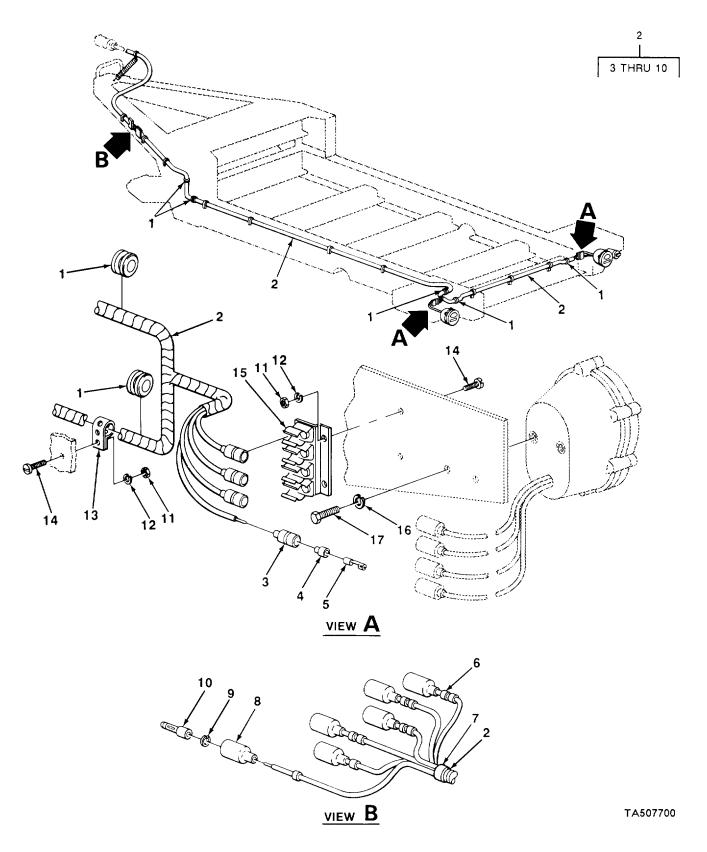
CHASSIS WIRING HARNESS (LATE MODELS)
